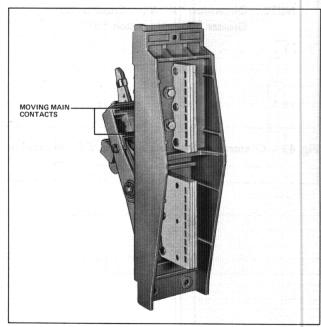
Type DS-532 Pole Unit Assembly - Rear View
